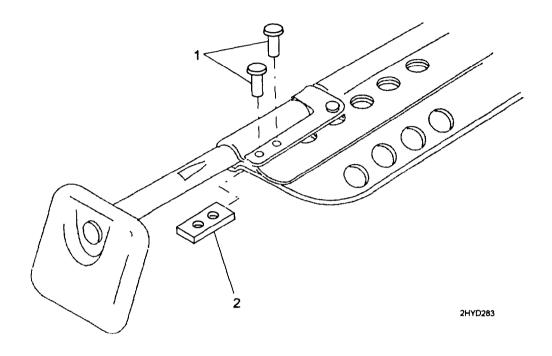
Group 070101 Machine Gun Leg (Right), PN 7269047
